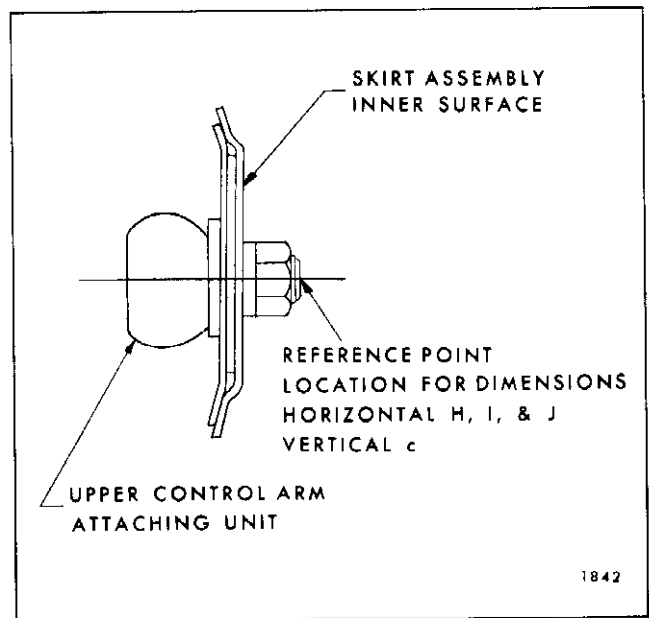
Upper Control Arm Rear Attaching Stud
